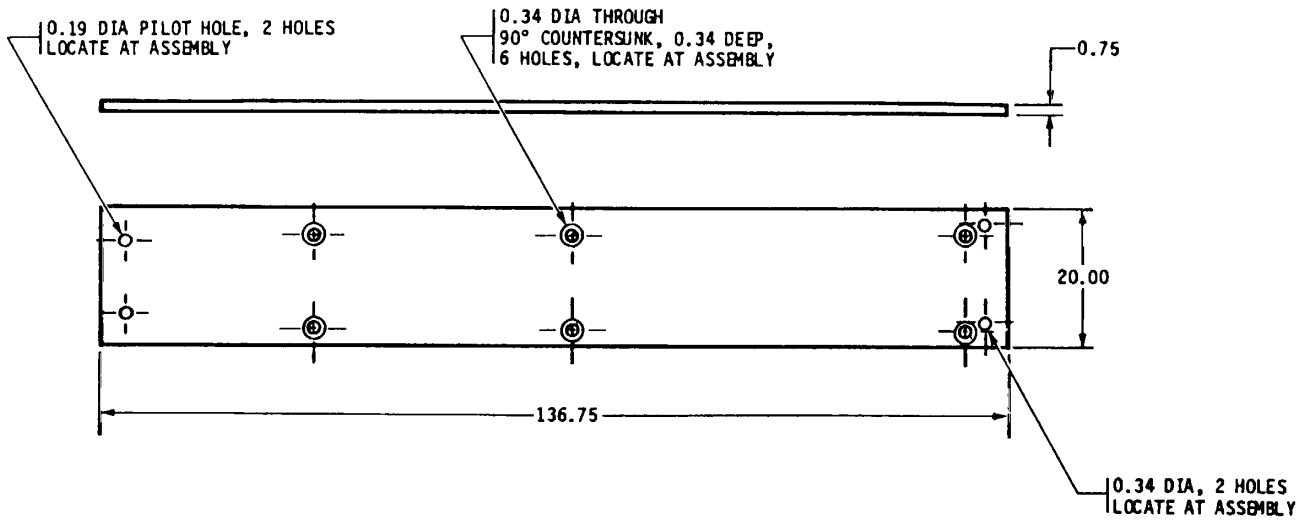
Dimensions for Left-Side Bench Top, Unit 1, 280.
